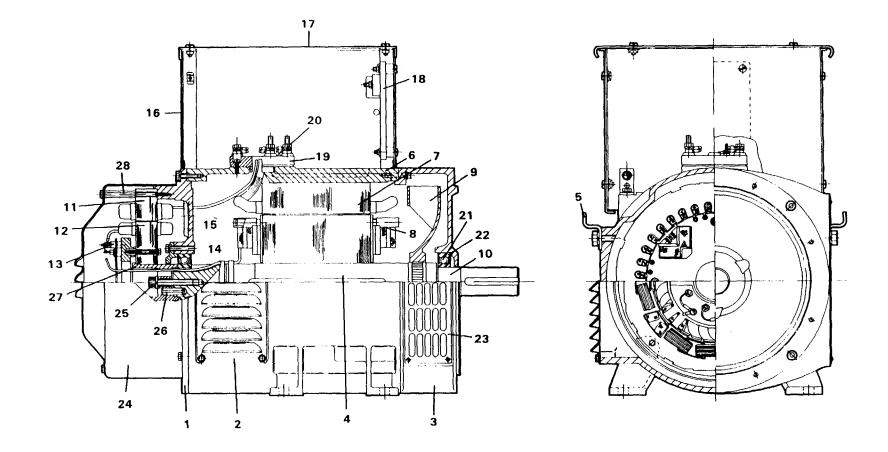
PC1 TWO BEARING MACHINE (OUTBOARD EXCITER)
